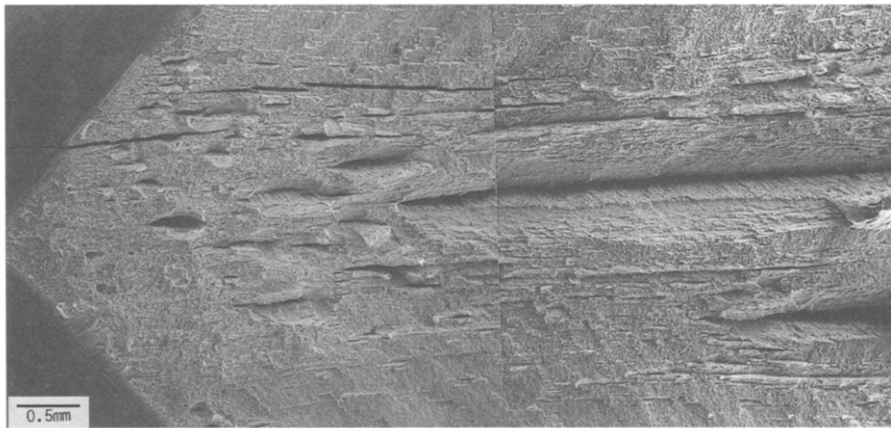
Fracture surface of specimen H190M-C9 in Hg showing a number of aborted attempts to develop cracks in the circumferential–longitudinal plane before the large serrations become established. Note the relatively planar crack morphology near the specimen surfaces, and that one of the first cracks in the plane normal to the main fracture has run back into the unstressed notch.
